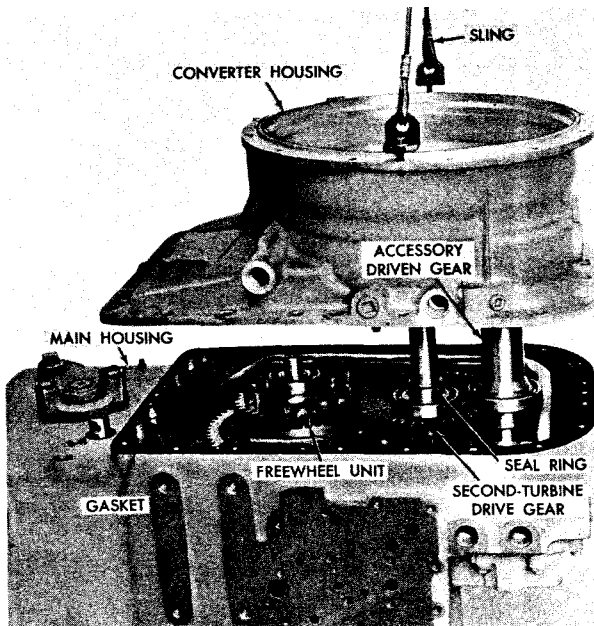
Removing (or installing) torque converter housing assembly from main housing
